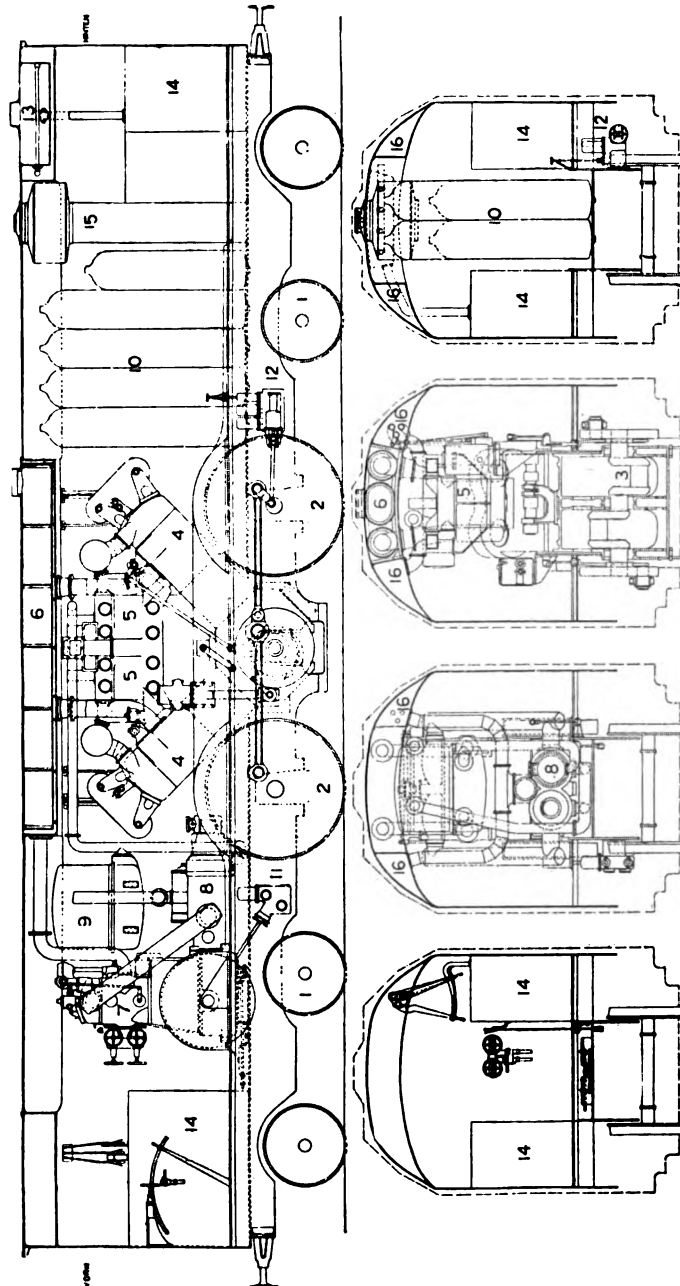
SECTIONAL VIEW OF DIESEL LOCOMOTIVE SHOWING CAR CONSTRUCTION
